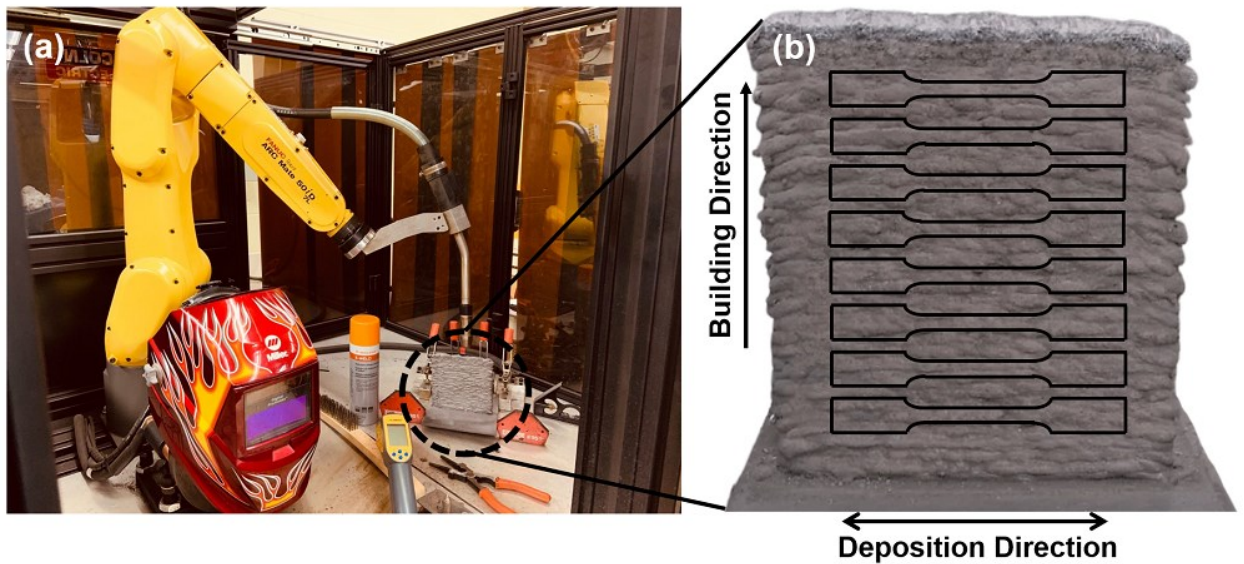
(a) The fabrication set-up and different equipment used for wire arc additive manufacturing of 420 MSS wall, and (b) the WAAM fabricated 420 MSS wall showing the tensile samples' orientation.
